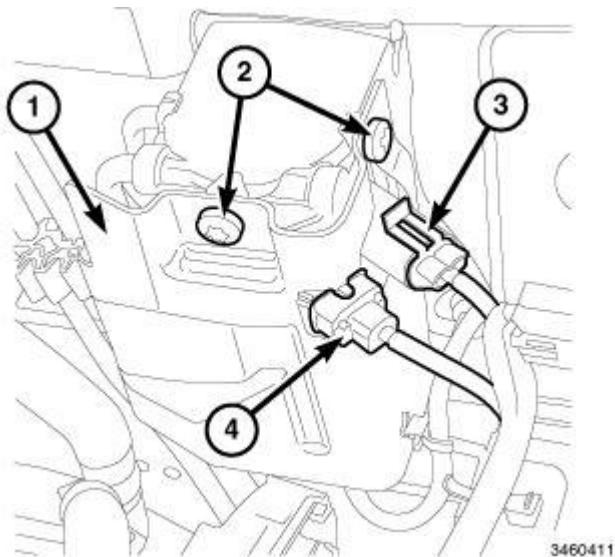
Fuel Filter Protective Shield, Bolts & Connectors
